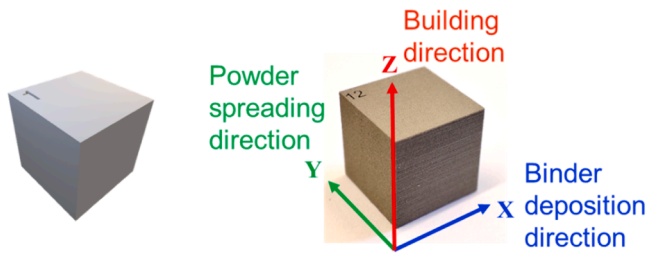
Images of the BJ cubical samples: pre-sintered sample (right) and CAD geometry (left).
